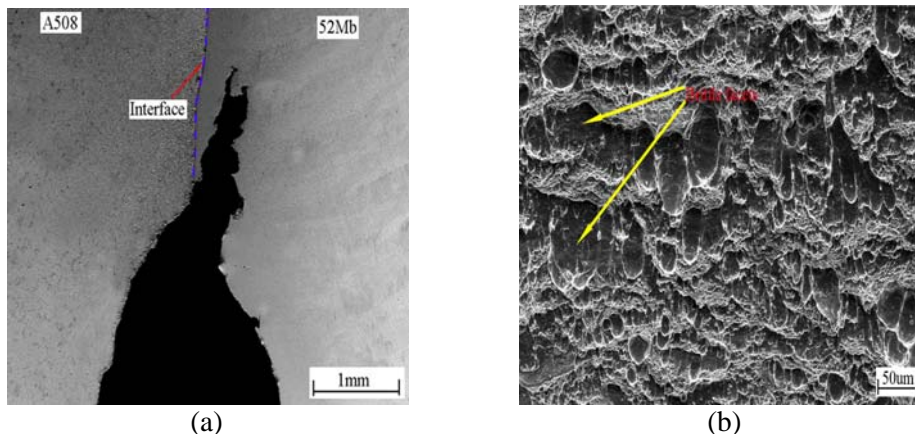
Crack growth path (a) and fracture surface (b) of A508/52Mb interface crack 3
